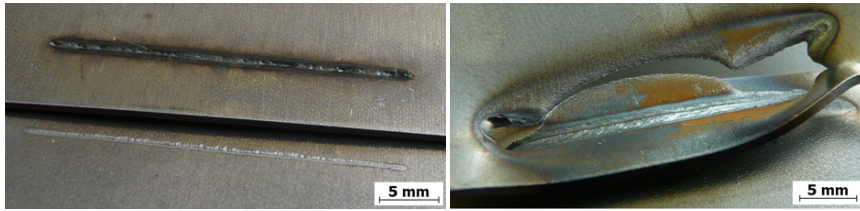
(a) Failure of the line weld seam with a length of 30 mm and (b) unbuttoning of the specimen
